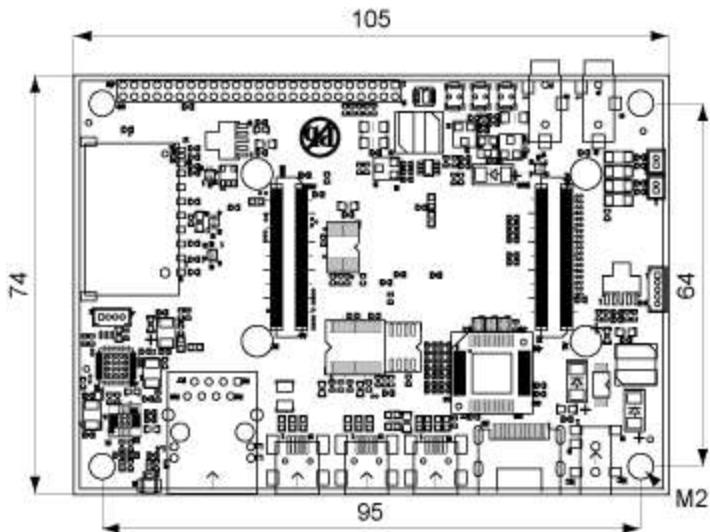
Thunder Baseboard dimensions (Dimensions in mm)
